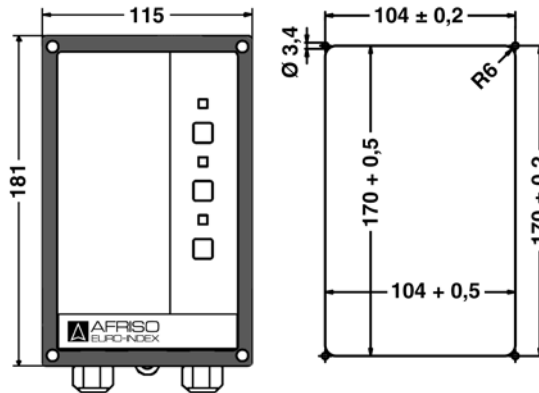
Transducer with mounting frame for panel mounting; right: panel cut out
